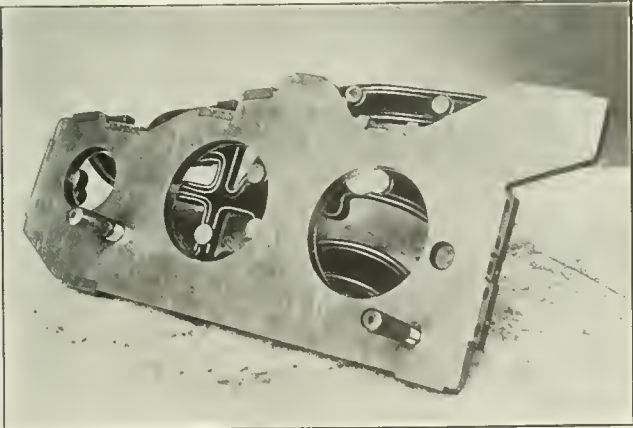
Templet used for Setting Cutters and Testing Finished Surfaces for all Milling Cuts on Both Right- and Left-hand Side Frames
